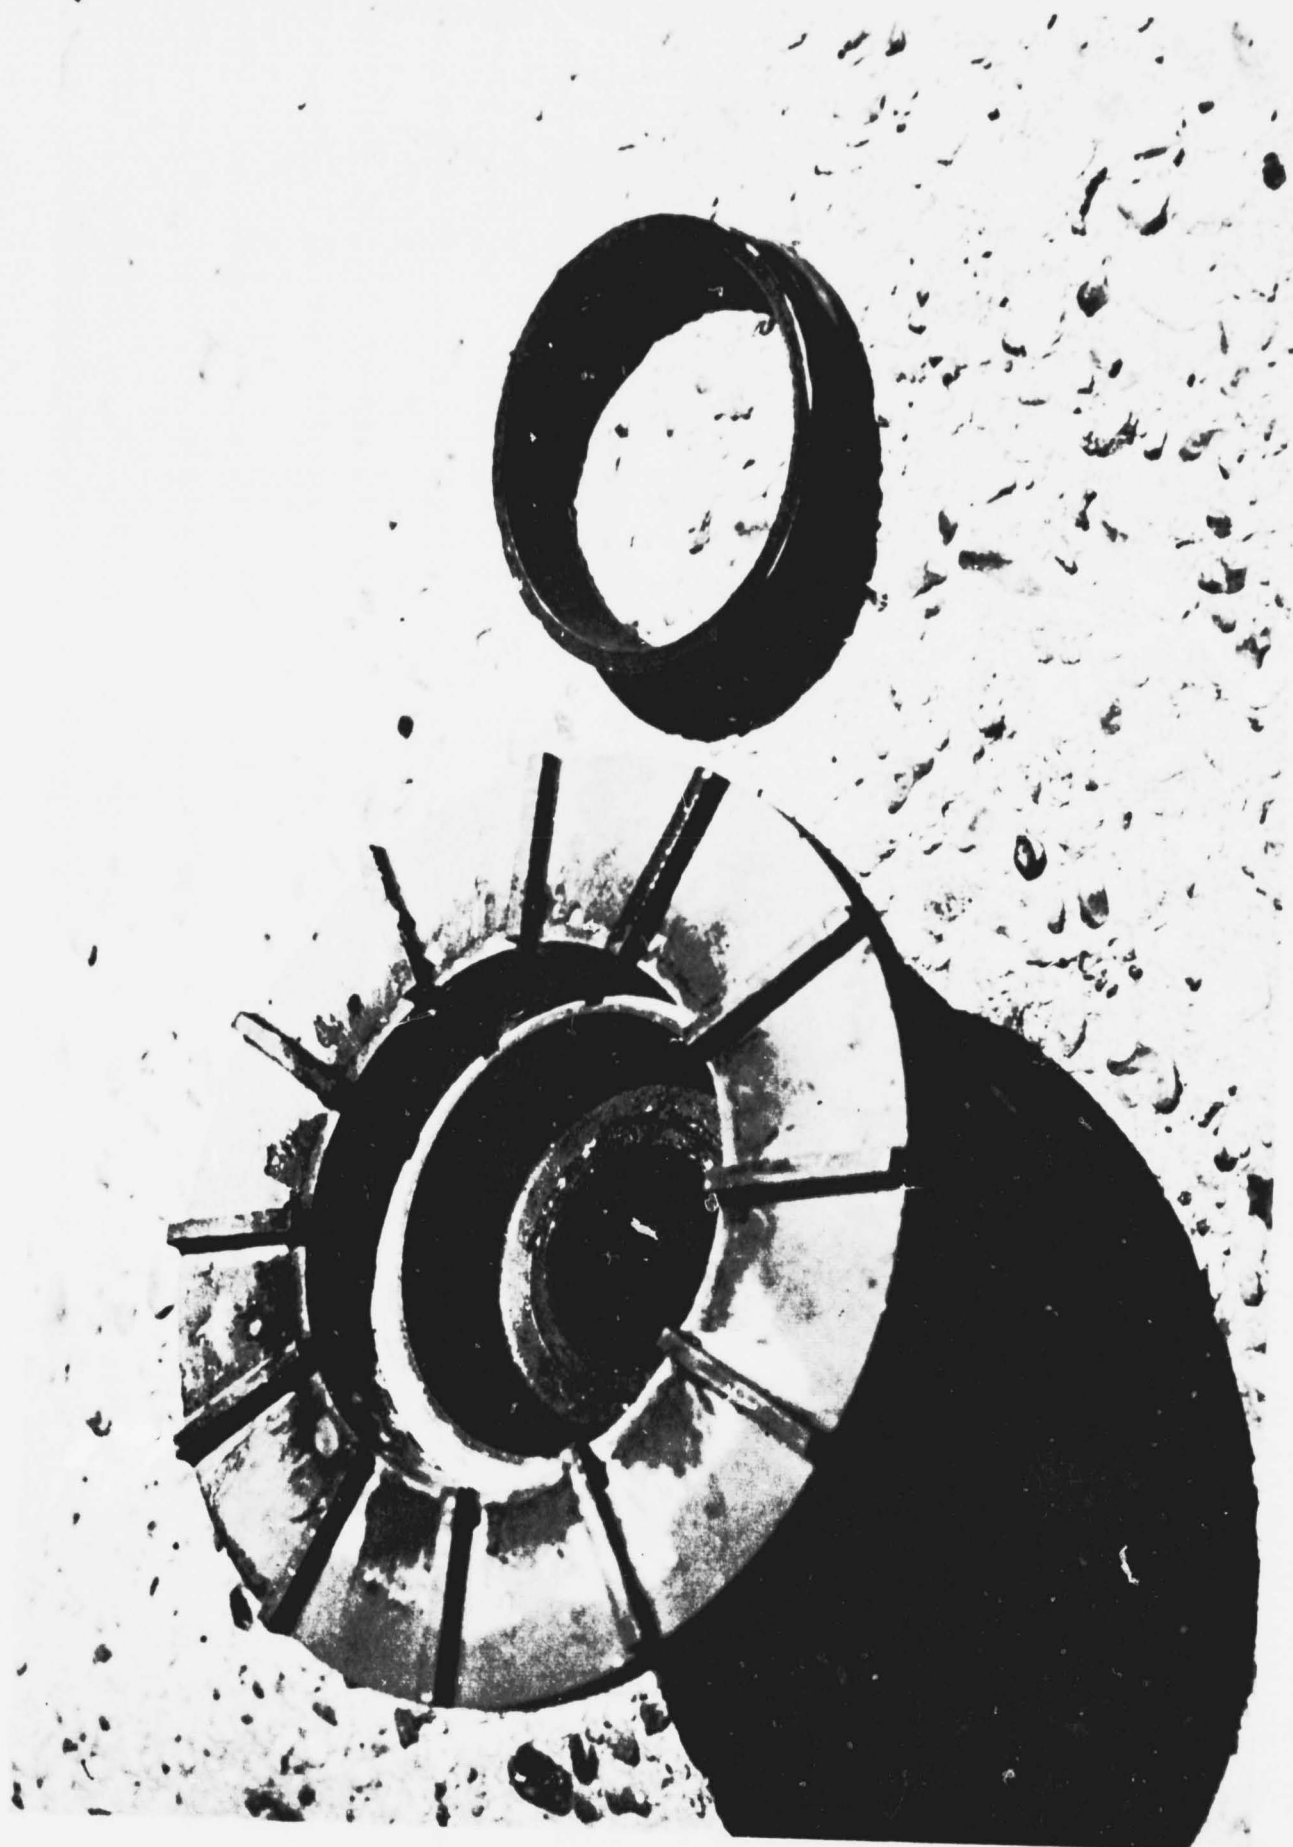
MAIN IMPELLER AND SEAL RING
